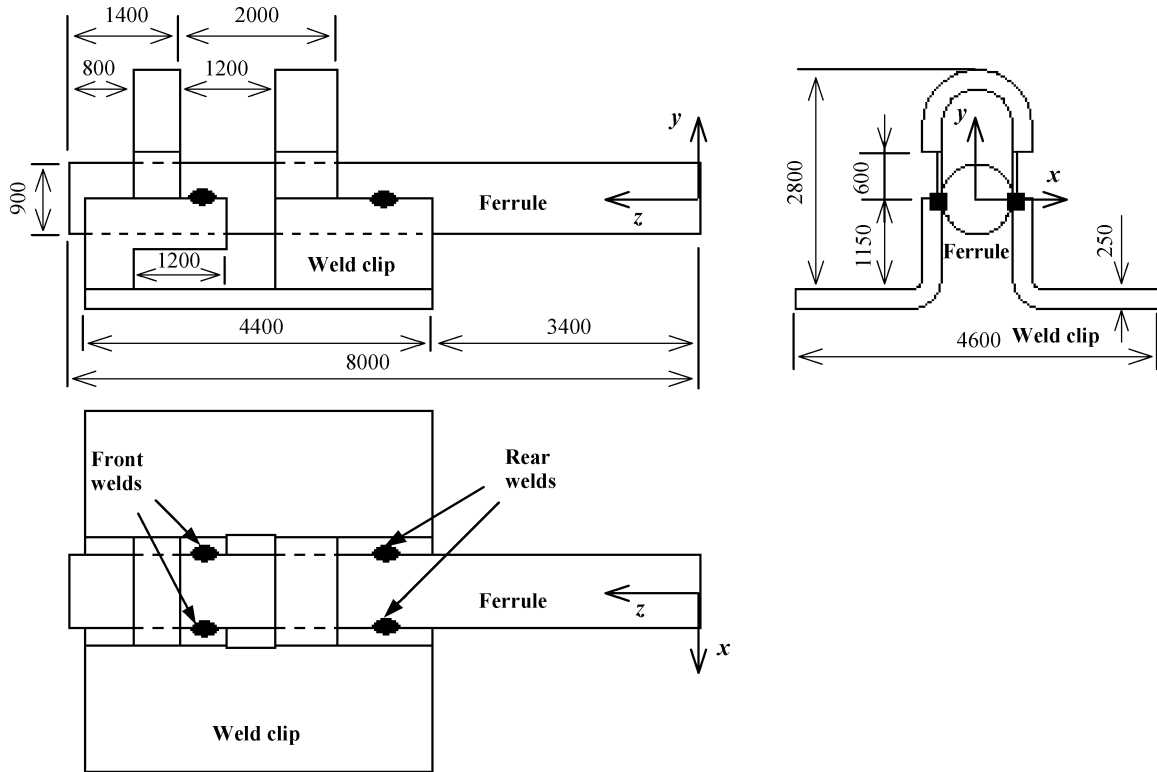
Geometry of the dual saddle shaped weld clip and the local fiber ferrule structure (units: μm).
